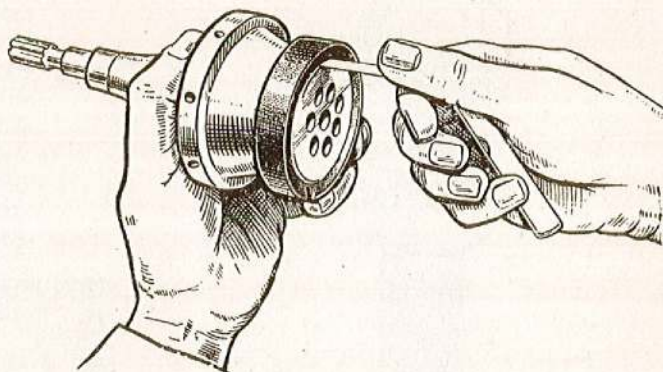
Checking clearance between the carbon ring and rotor bearing face
